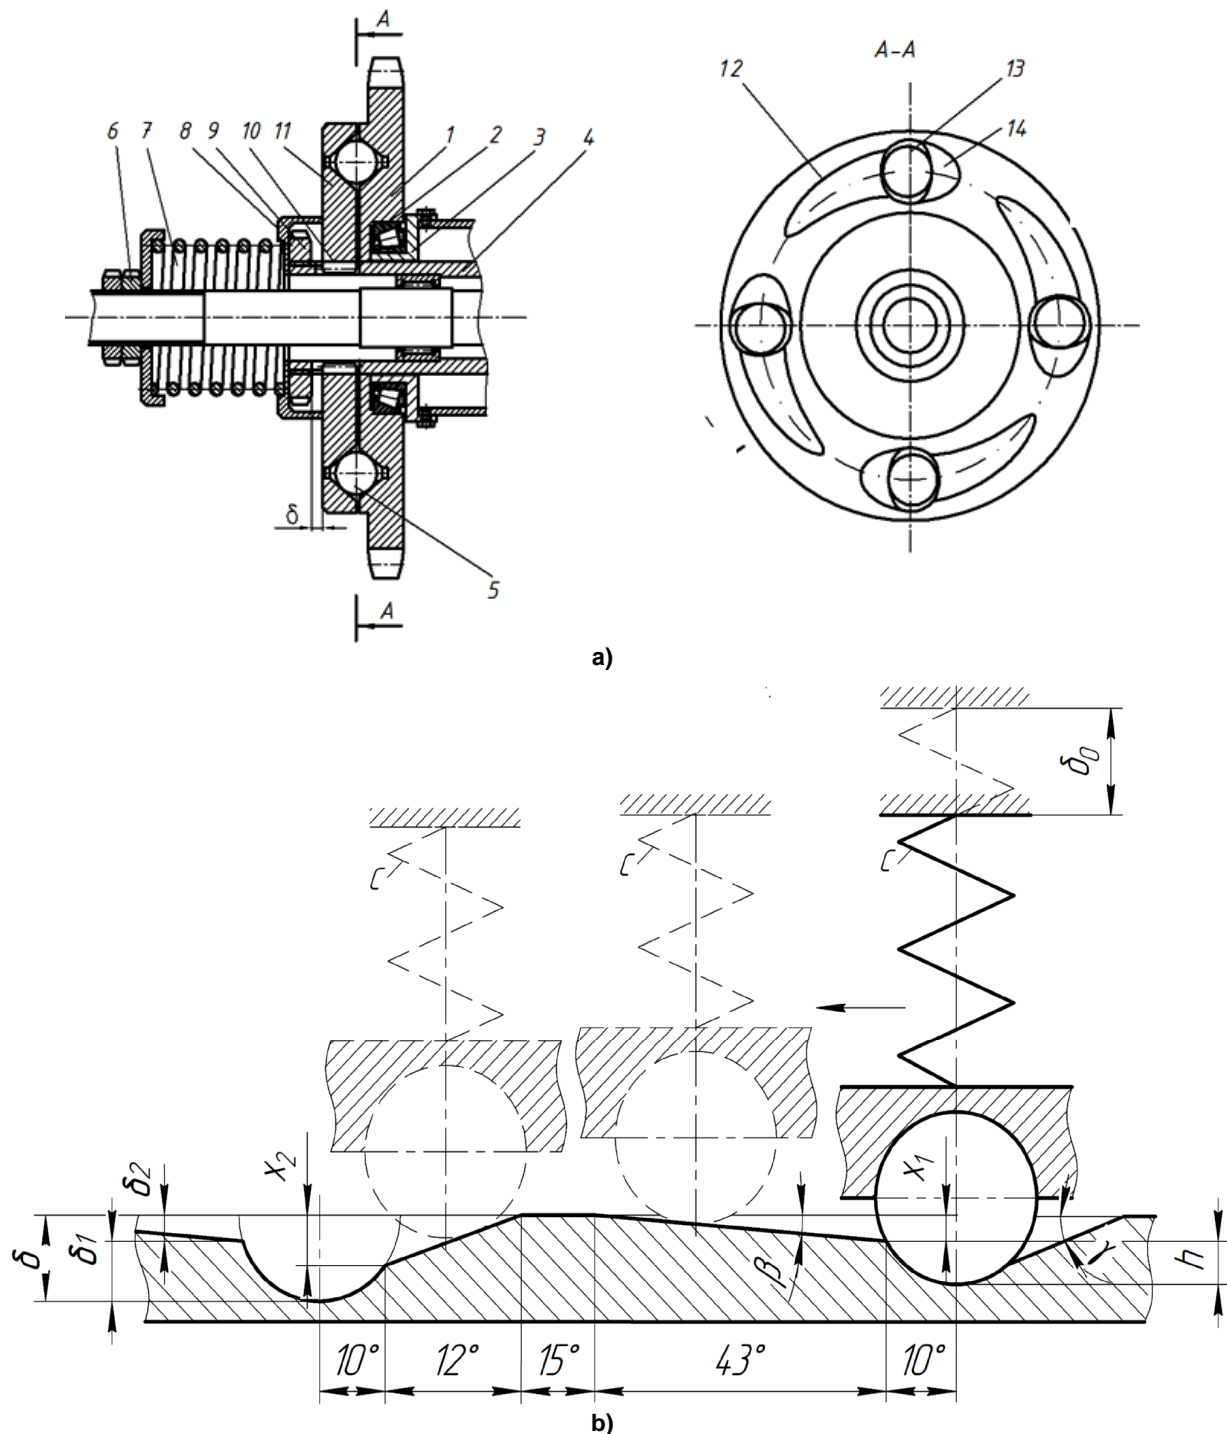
The constructive scheme of the safety device (a) and the scheme of the reamer of the working surface (b) / Конструктивна схема запобіжного пристрою (а) та схема розгортки робочої поверхні ведучої півмуфти (б)
